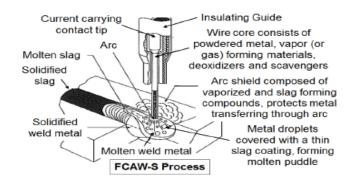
FCAW-S self-shielding wire welding procedure
